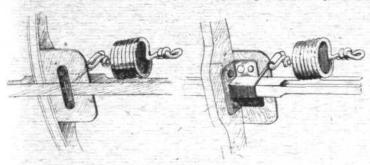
Sketches showing safety-belt attachment on the Pfalz.
